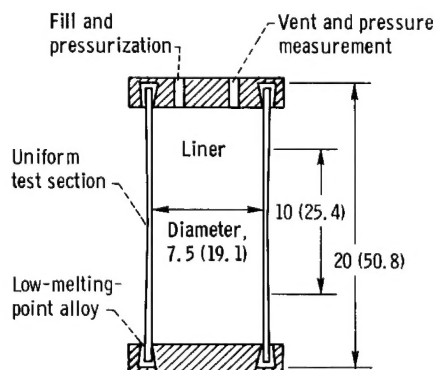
Biaxial cylinder with removable end caps used for cyclic tests. (Dimensions are in inches (cm).)
